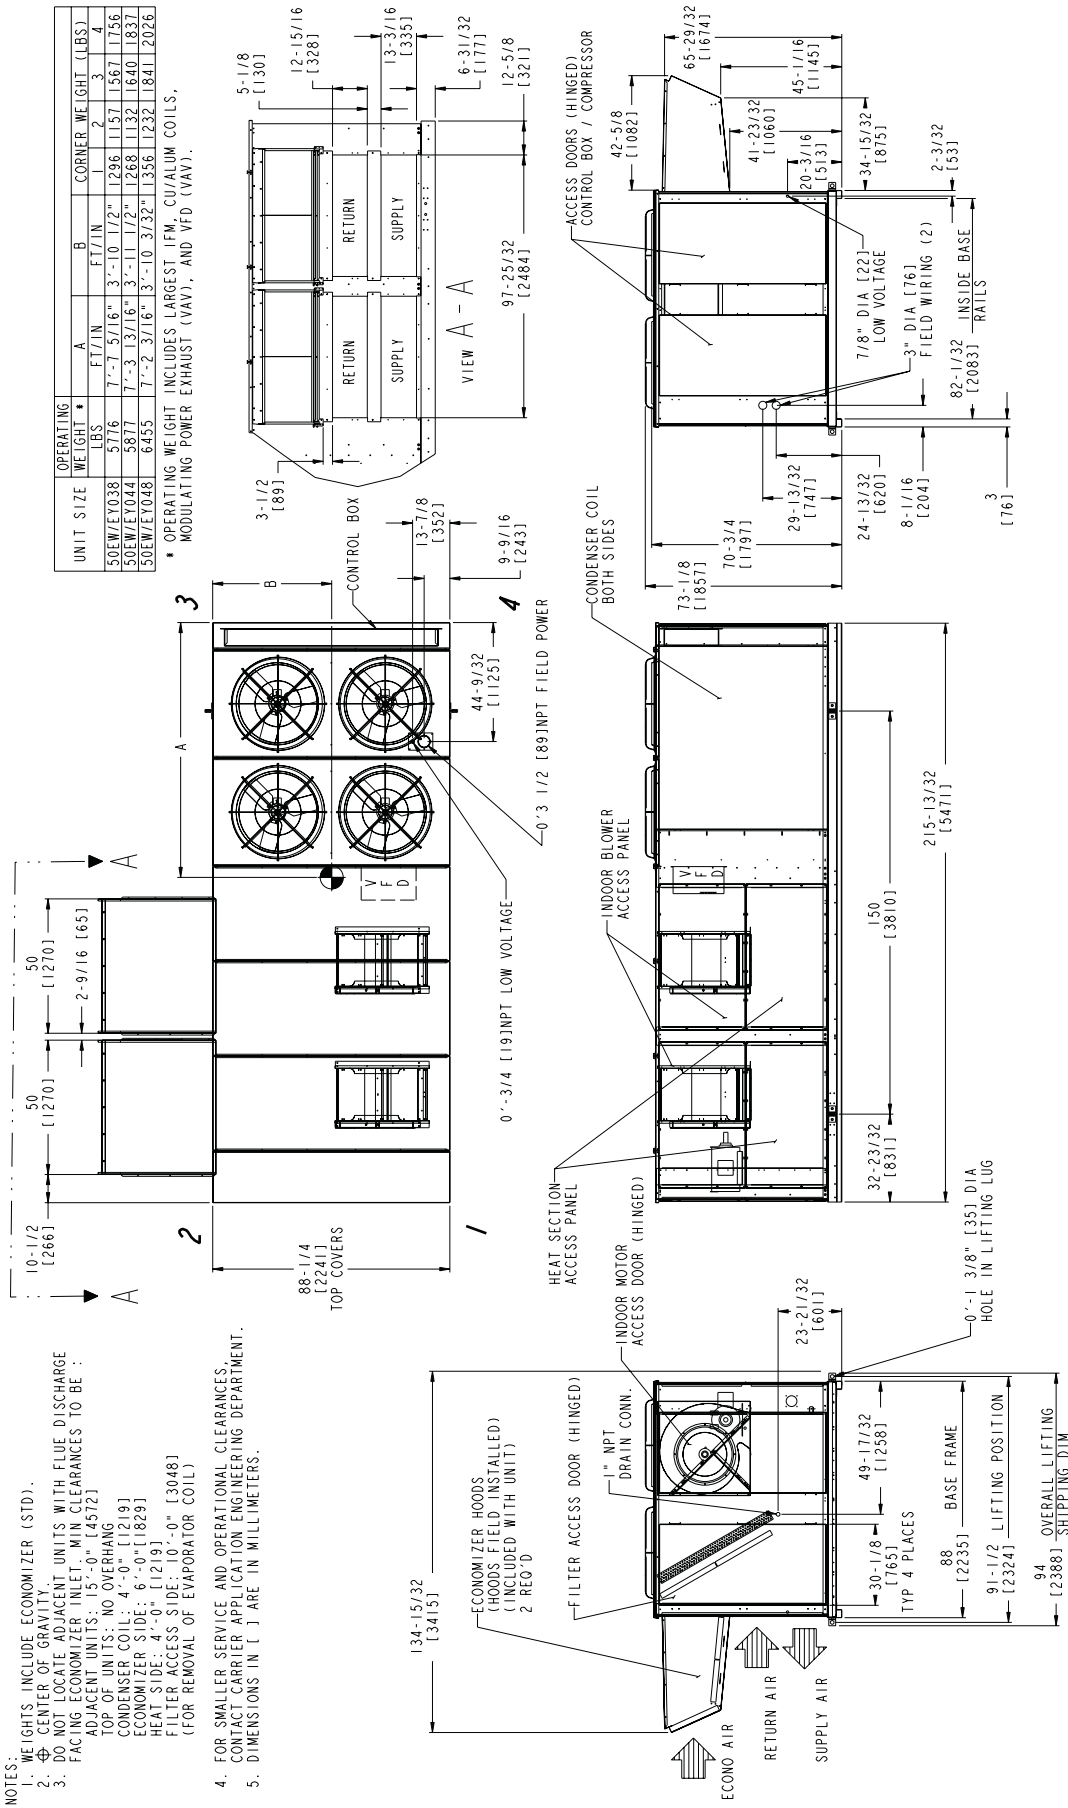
Base Unit Dimensions — 50EW, EY038-048
